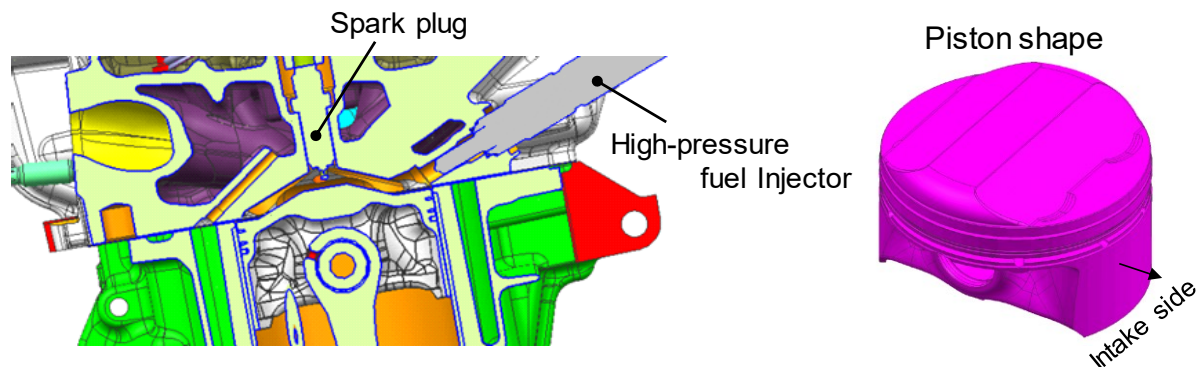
Combustion chamber configuration and piston shape of the test engine
